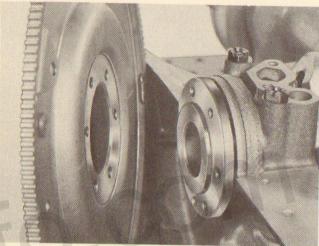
Be Sure Surfaces Are Clean When Installing Flywheel
